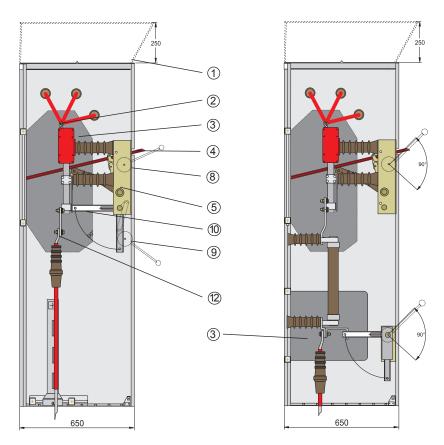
Side view of cable feeder panel FK24-606519-27 With switch disconnector H27 EK
